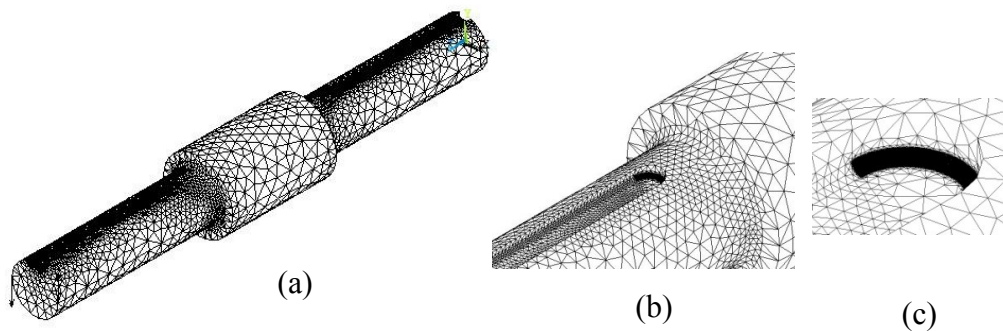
3D shaft FEM models of Fessler and colleagues [1], (a) Shaft, (b) Magnifying view of keyway on the shaft, (c) Magnifying view of keyway fillet
